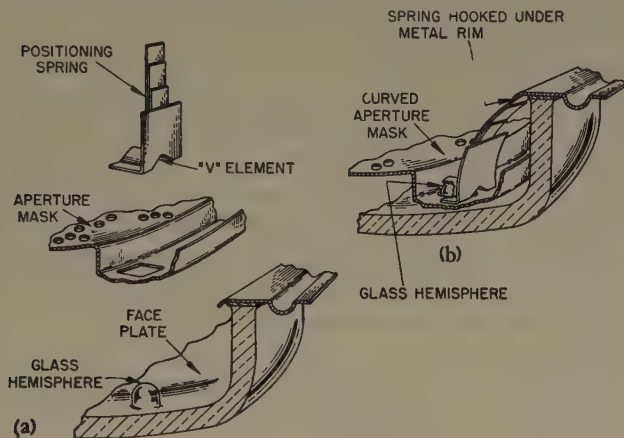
Details of mounting spherical shadow mask. (a) "Exploded" view of mounting structure. (b) Sectional assembly showing position of leaf springs.
